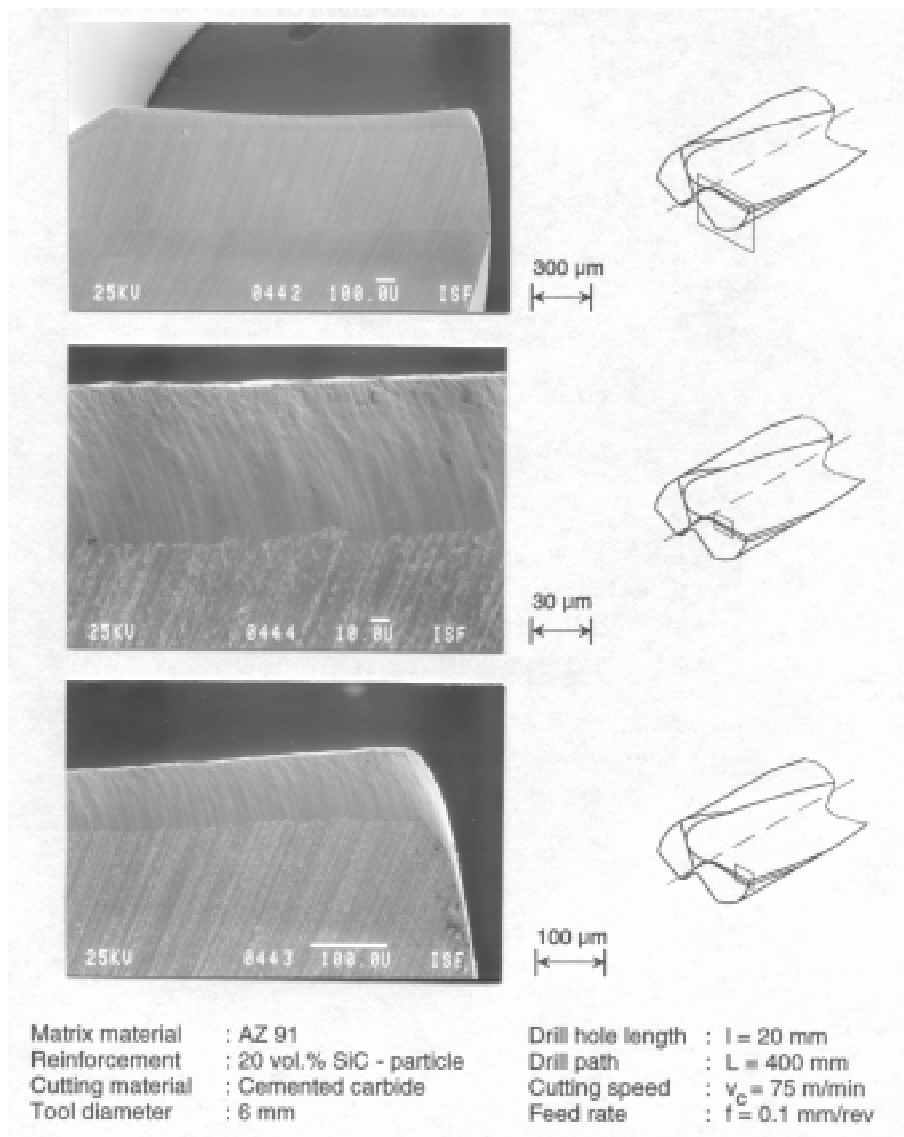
SEM photographs of the tool wear when drilling particle reinforced magnesium with cemented carbide drill
